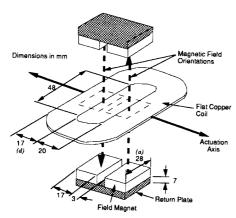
EXPLODED VIEW OF FLAT COIL ACTUATOR CONFIGURATION
